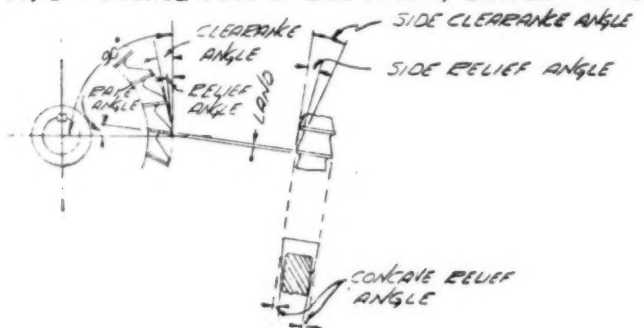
NOMENCLATURE OF FACE MILLING CUTTER TEETH
